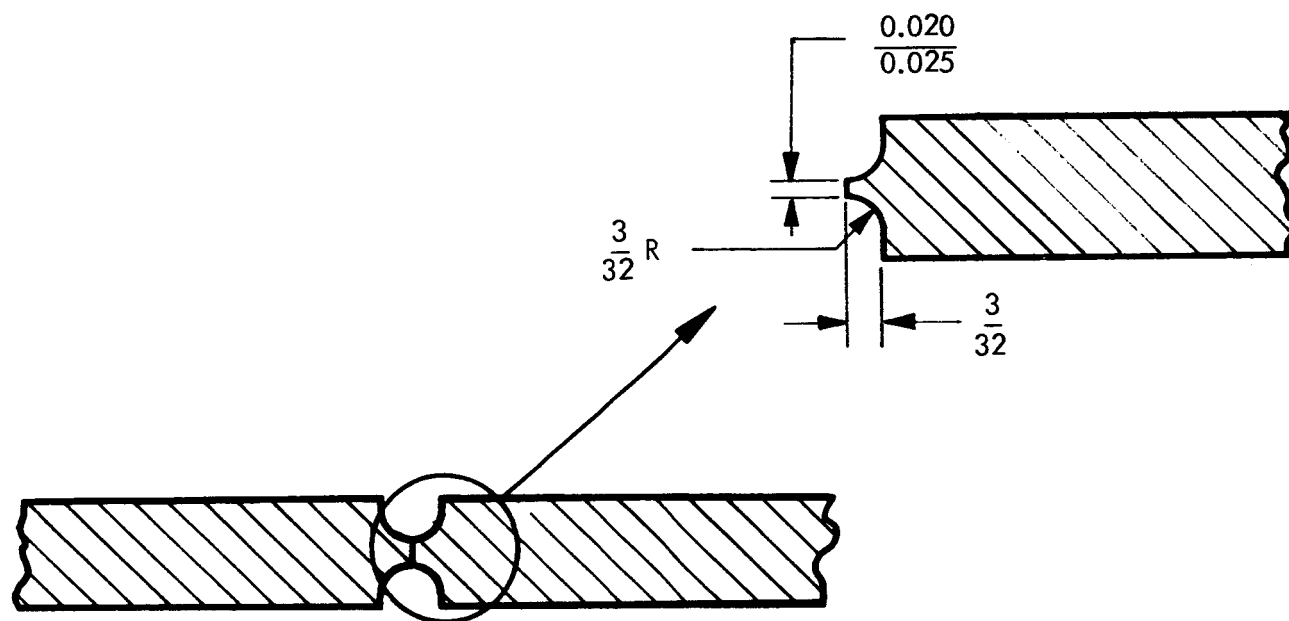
TIG Butt Weld Fixtures
